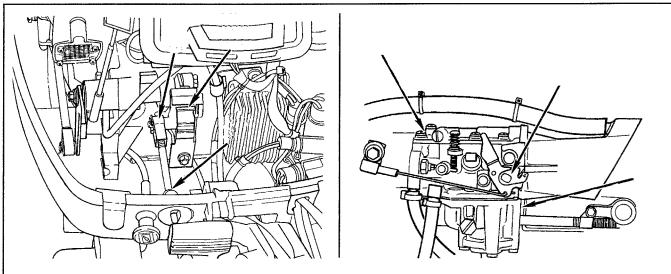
Shift lever shaft and detent (left) and carburetor, choke and throttle linkage (right) and lubrication - 9.9/15 hp (305cc) 4-stroke motors
